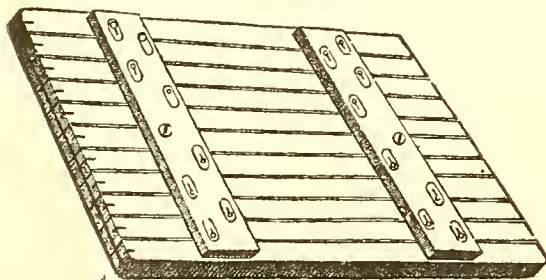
Drawing Board, with Grooved Back and Ledges put on with Slotted Holes.
